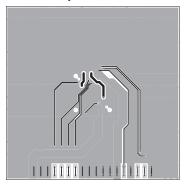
SKY65329-NP Evaluation Board Assembly Drawing
